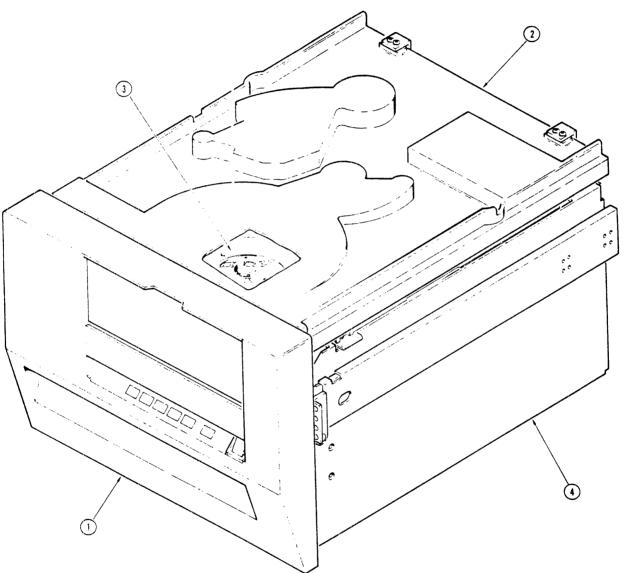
Model 1/1990 Magnetic Tape Streamer Unit (Assembled View)
